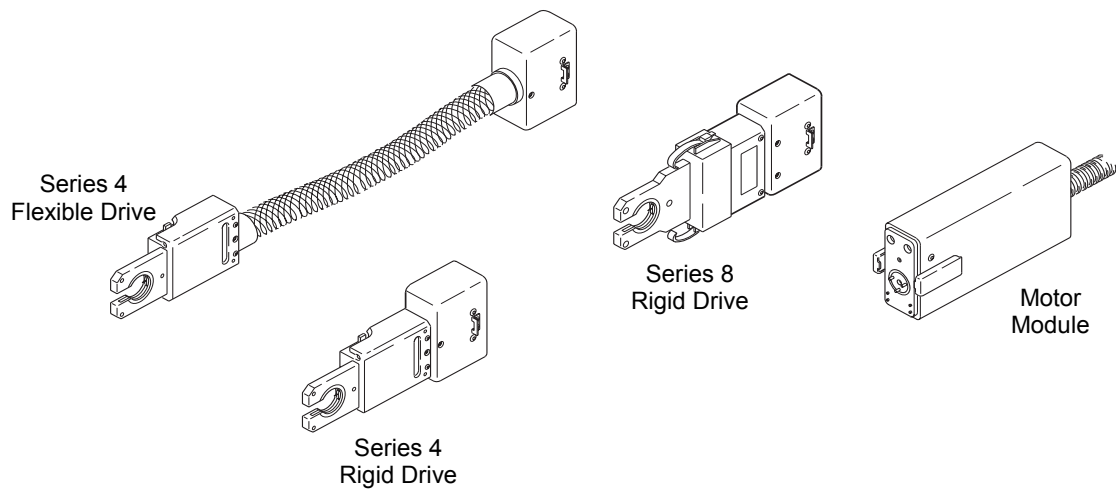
Rigid-Drive and Flexible-Drive Micro Weld Heads
